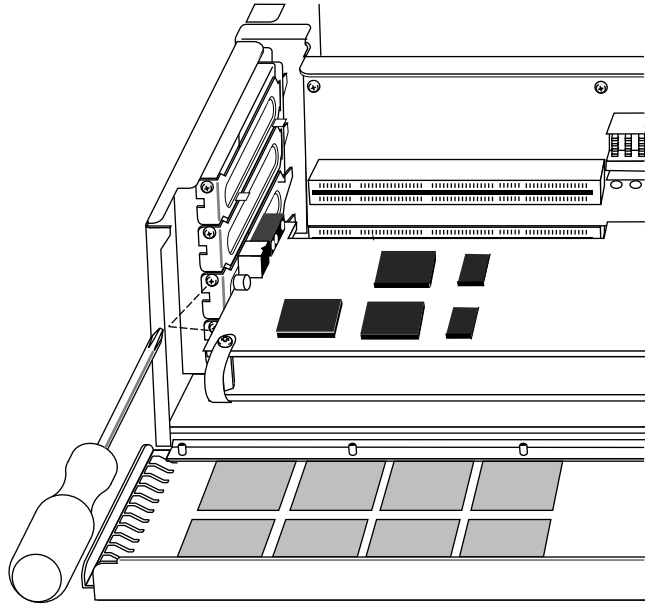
Inserting the Screws for the High IMPACT Board Set
